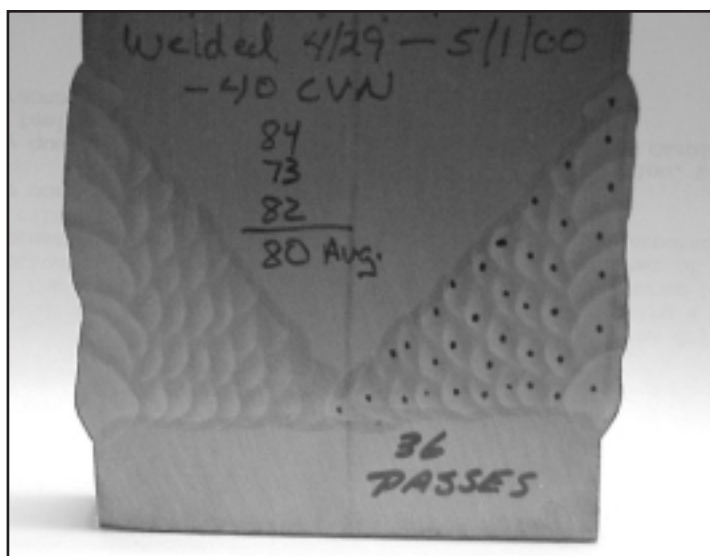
CJP groove weld completed by pulsed GMAW without back gouging.
